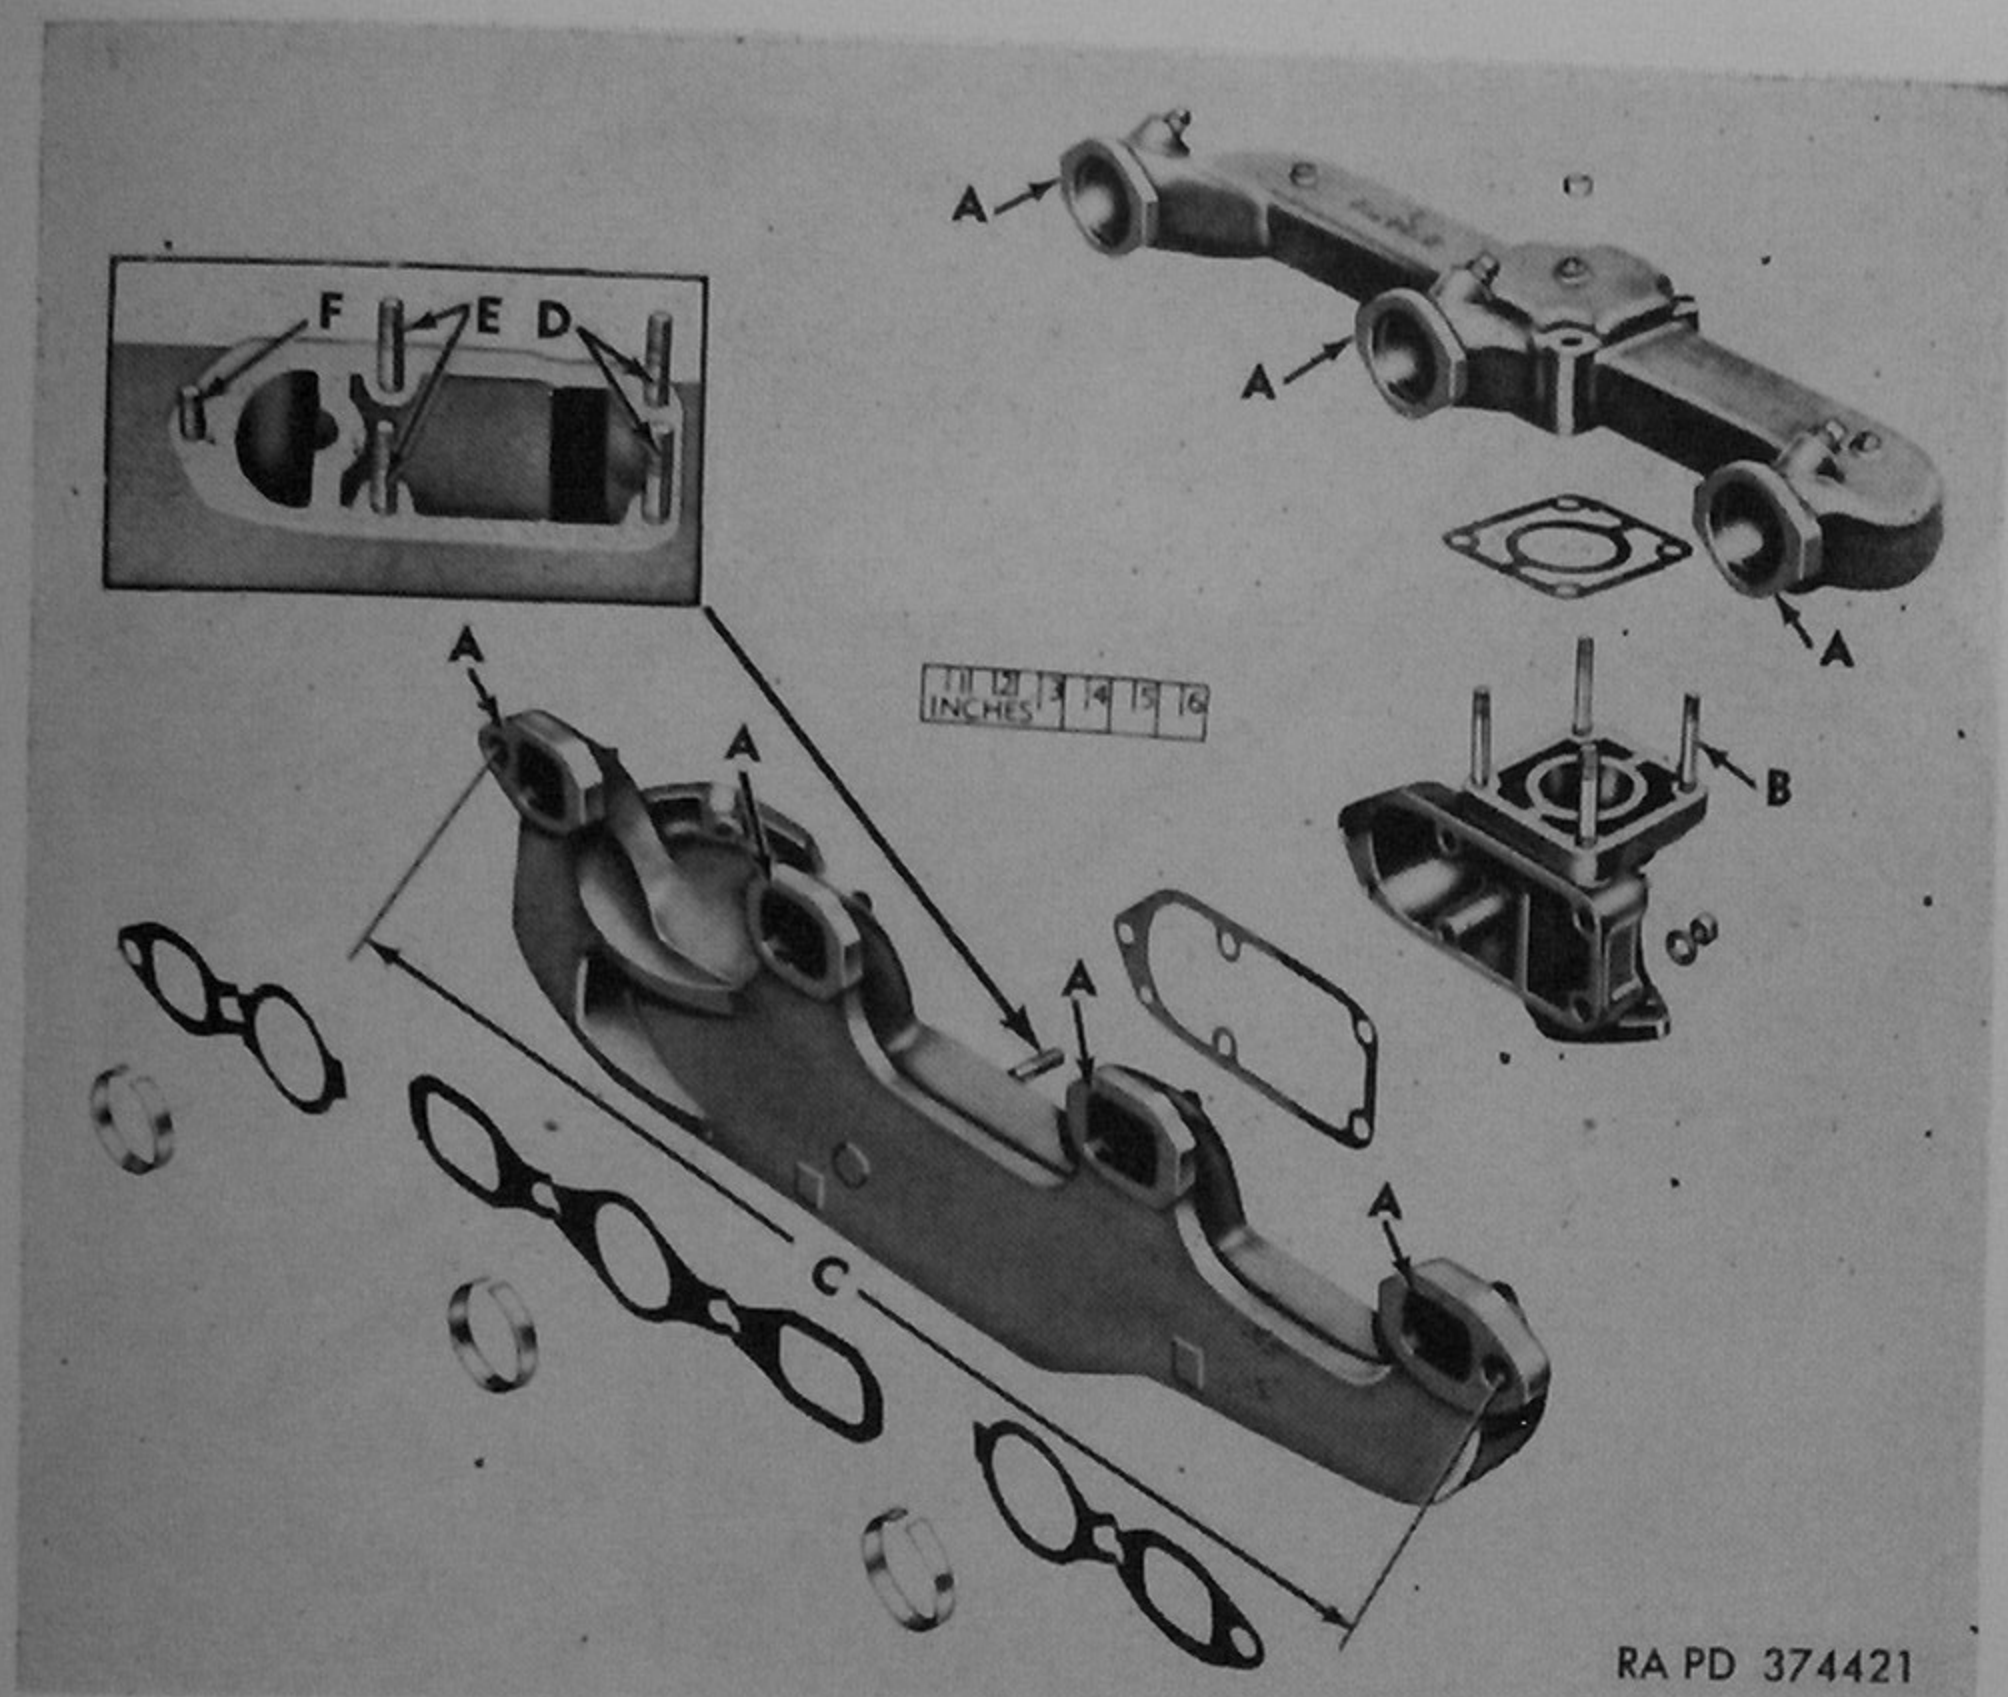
Repair and rebuild standard points of measurement for intake and exhaust manifolds and fuel vaporizer (engine assembly 8726920).
